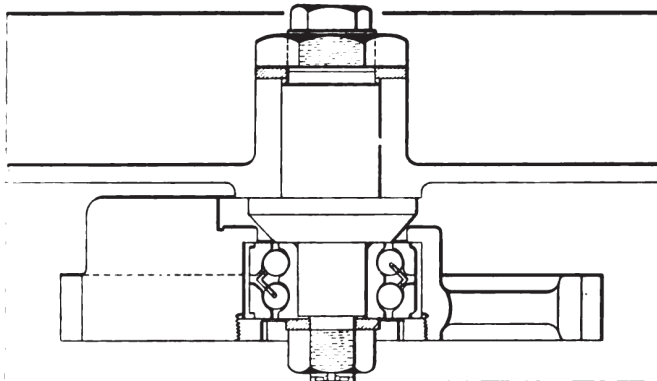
Auxiliary balance gear showing New Departure ball bearing and eccentric spindle with adjusting nut outside
